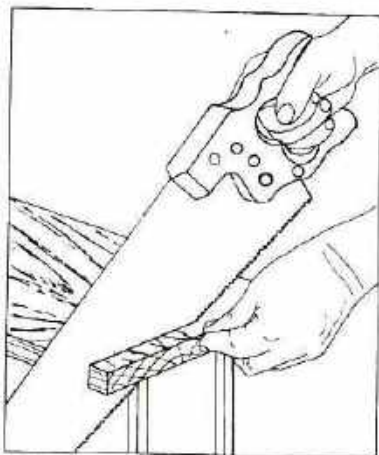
CROSS CUTTING A BOARD WHICH IS HELD IN BENCH VISE
